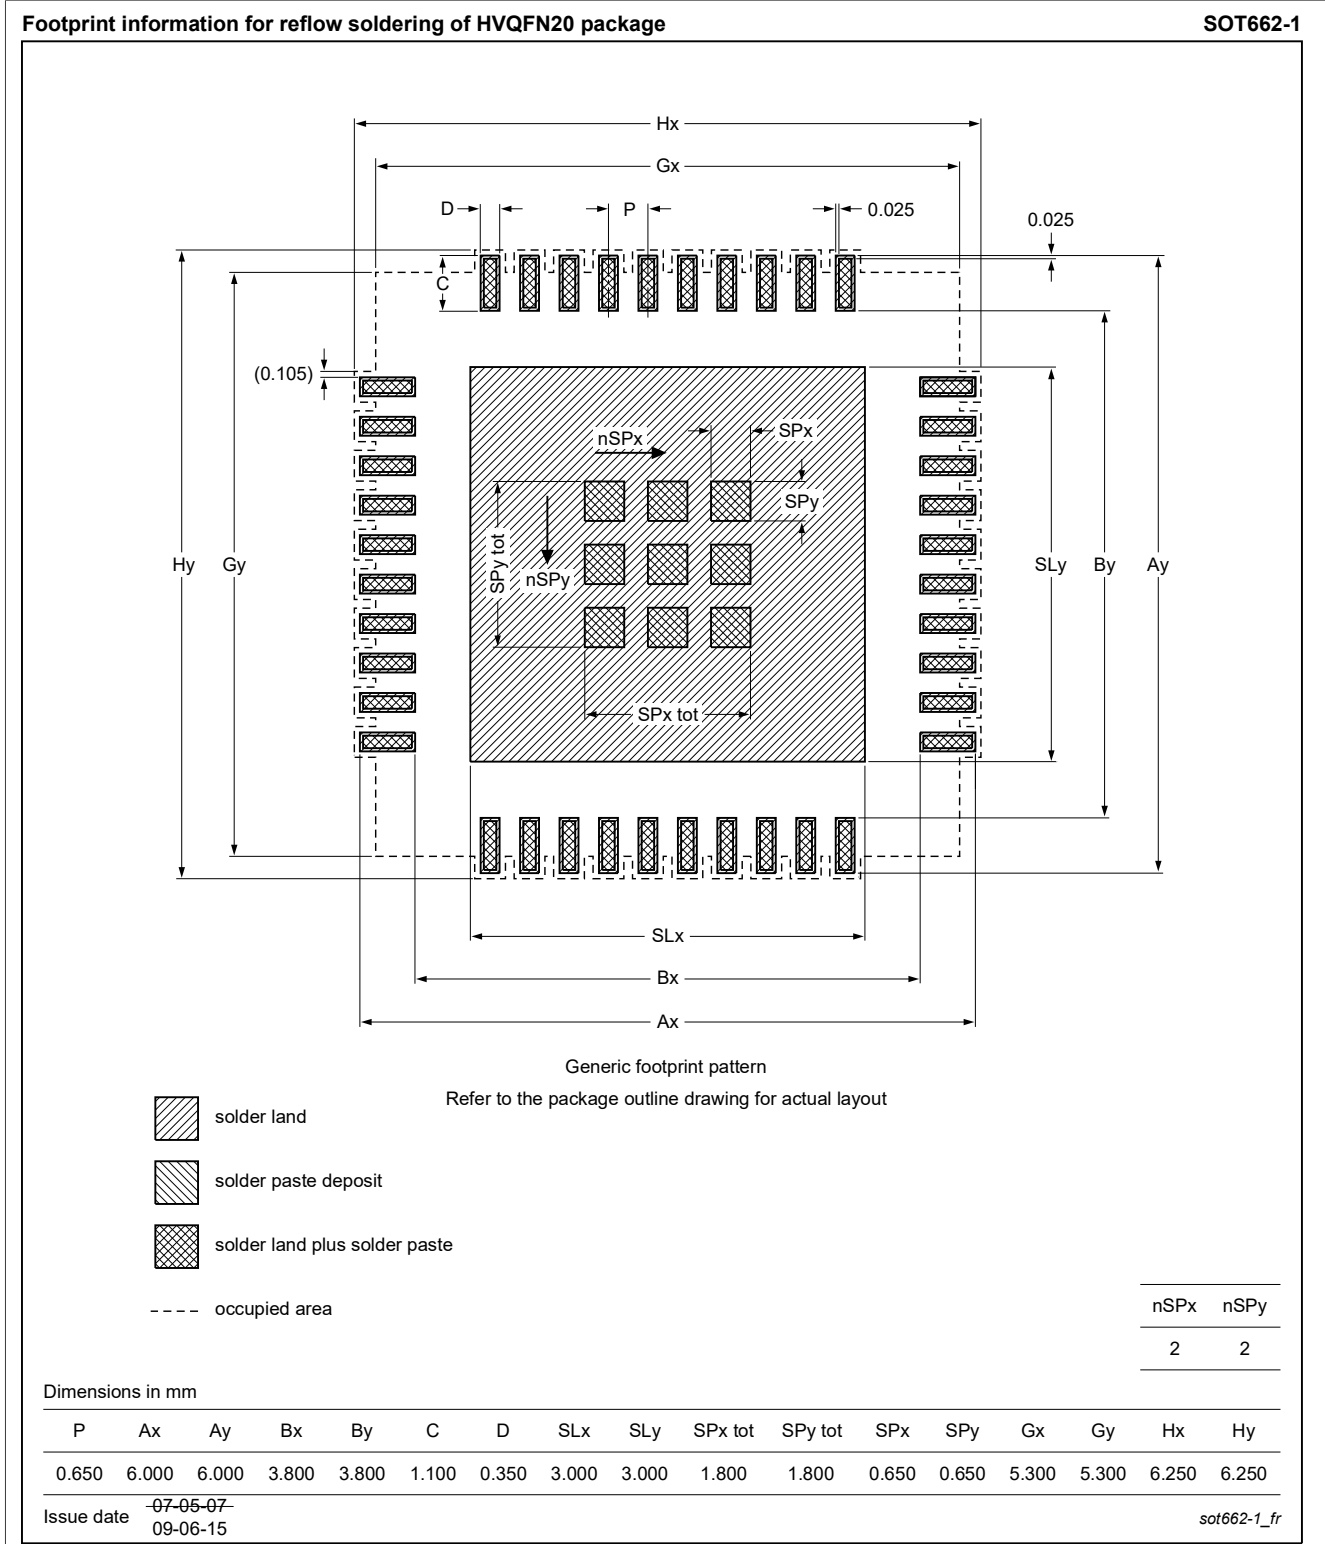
PCB footprint for SOT662-1 (HVQFN20); reflow soldering
